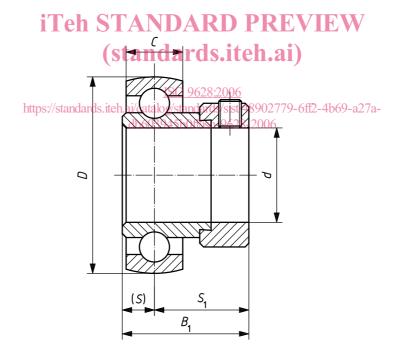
Bearing with eccentric locking collar — Narrow overall width
